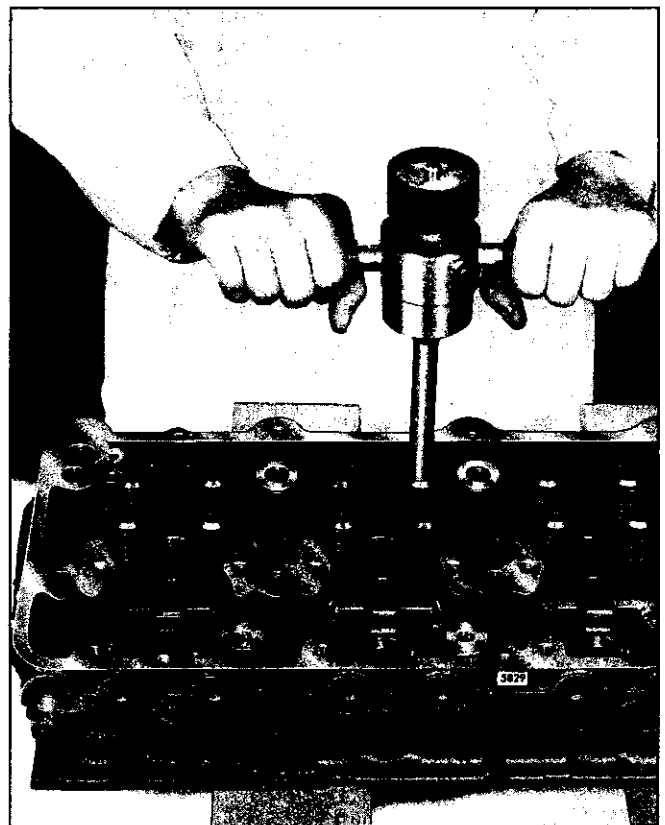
Checking Valve Opening Pressure with Gage J 25076-B
